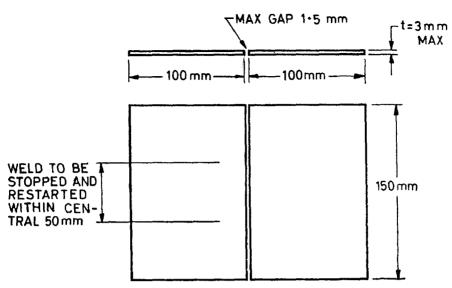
Test Piece for Butt Weld in Sheet (Without Permanent Backing)
